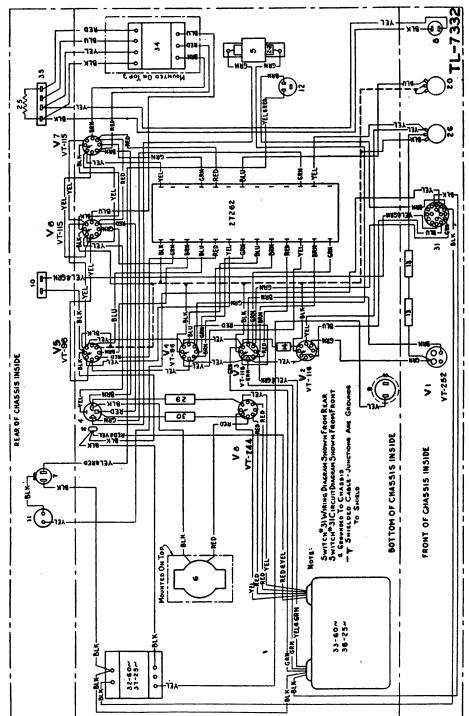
Keyer TG-10-(1), wiring diagram.
